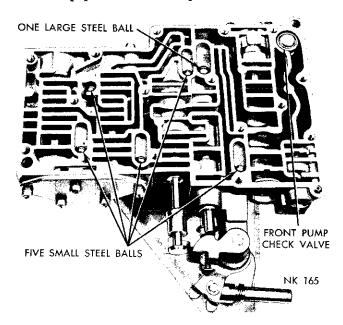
Front Pump Check Valve and Steel Ball Locations
